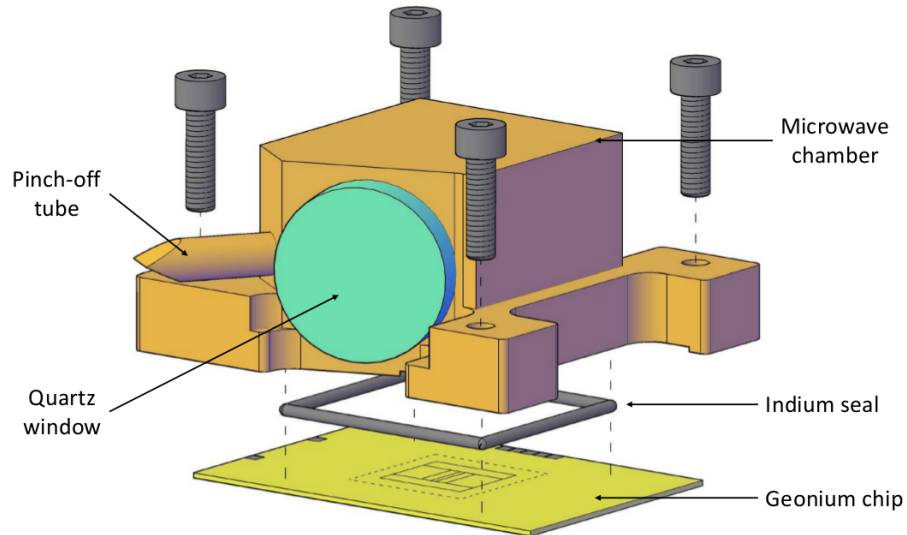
Drawing of the inner cryogenic chamber with chip, window and pinch-off tube sealed [14].
